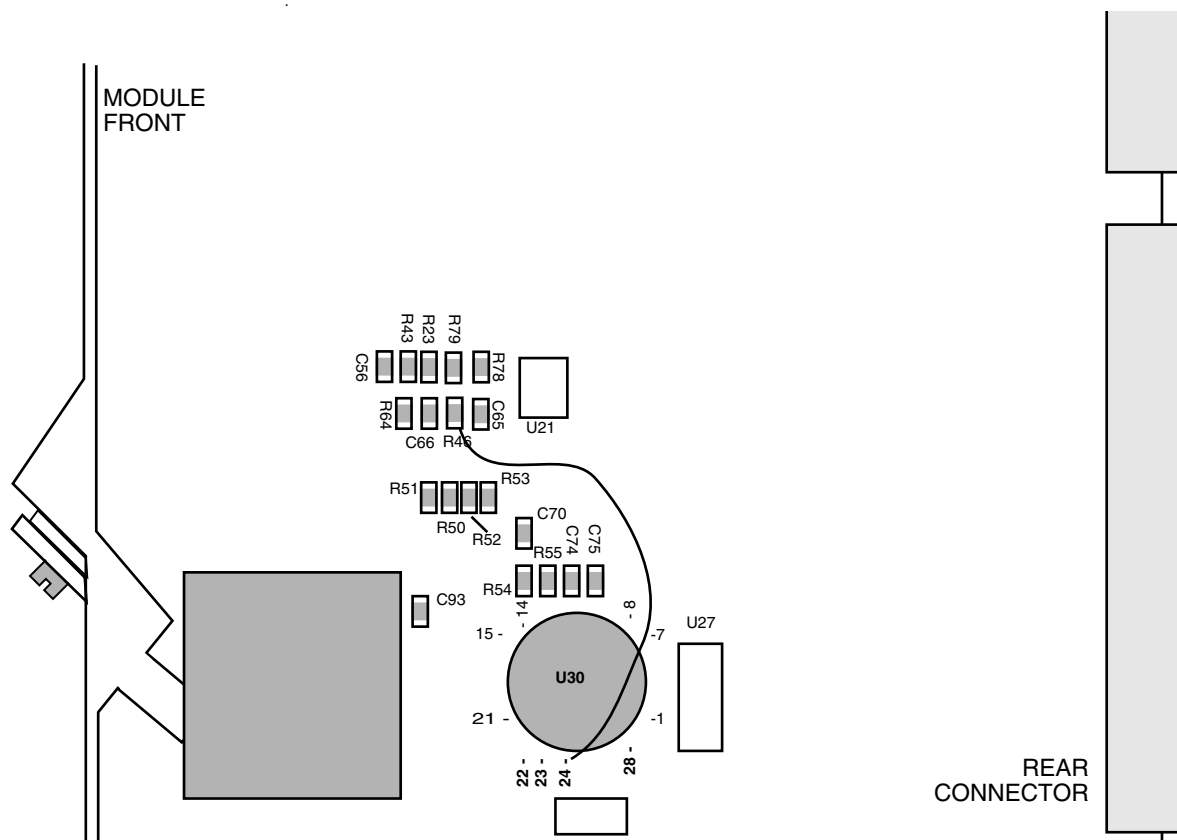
MCF Receiver 066040-00, -10, -20, and -21 Modification
